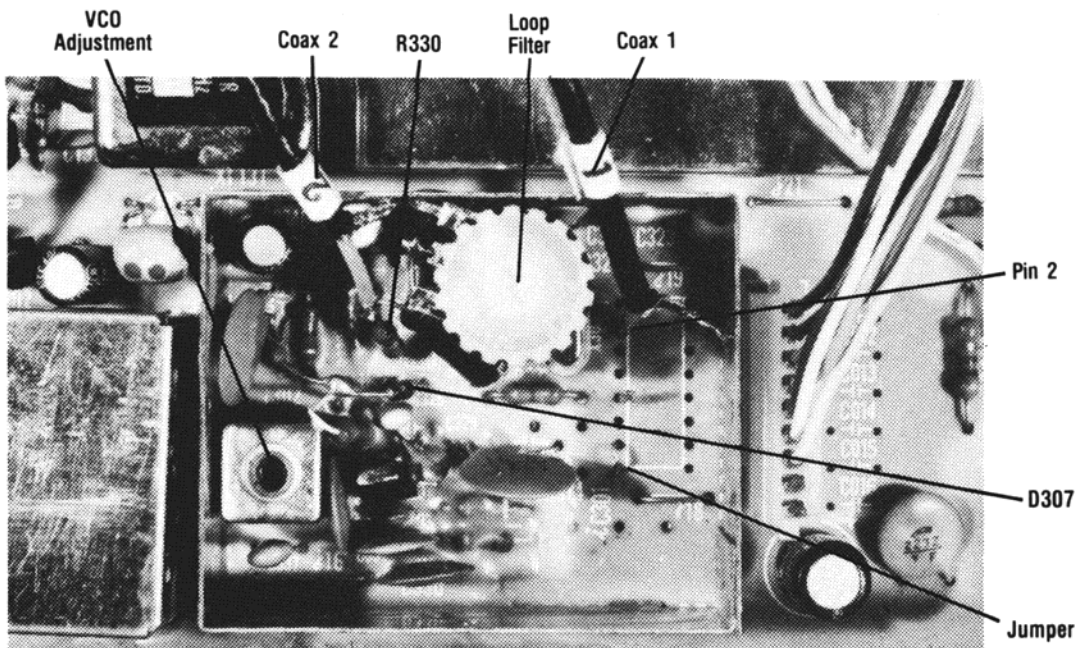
Sears Roadtalker Parts Location, SM5104 chassis
